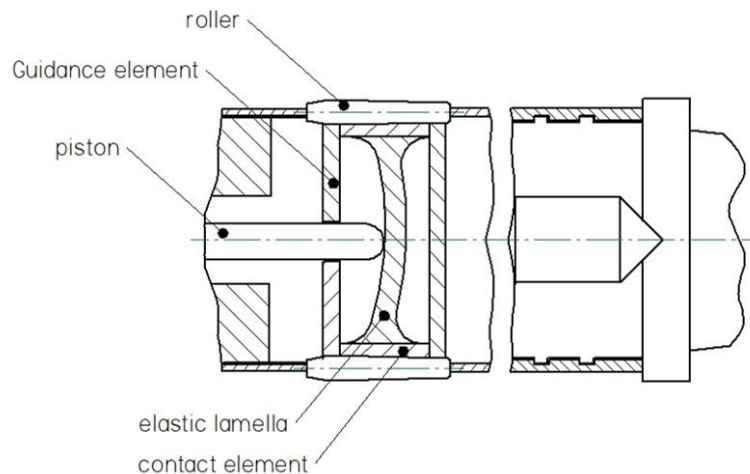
Hardening tool with depth adjustment of rollers via an elastic element.
